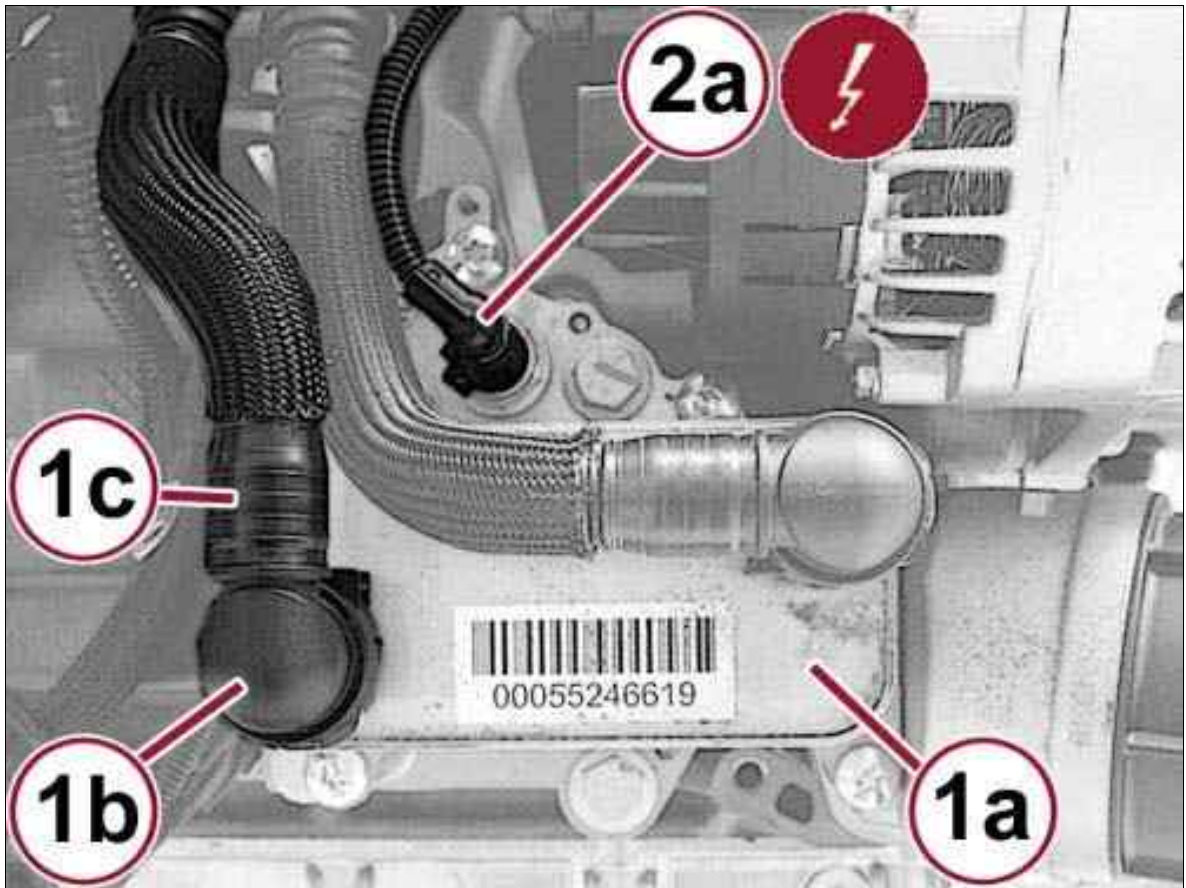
Spring Retainer, Quick Coupling & Coolant Pipe
